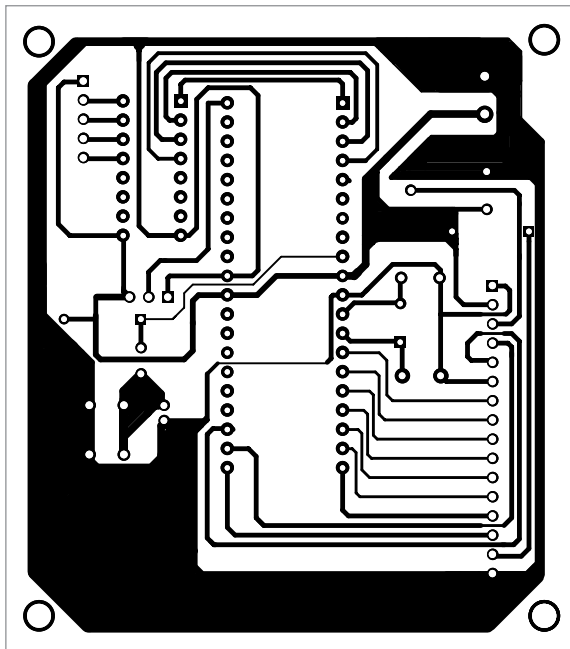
Actual-size PCB layout of the joystick based stepper motor angle controller using AVR MCU
